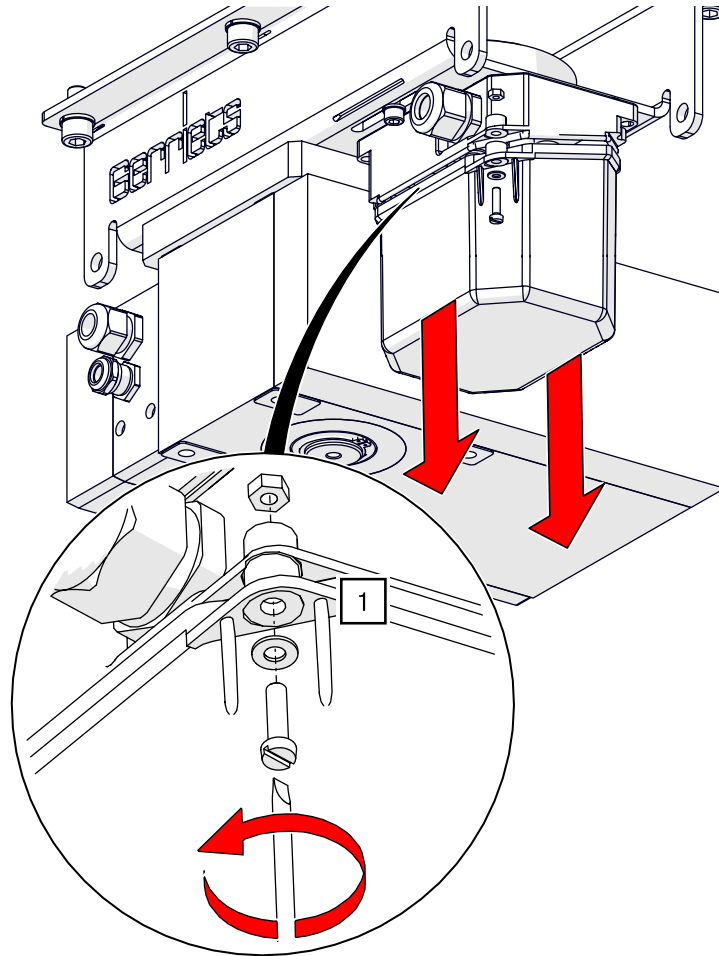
Setting emergency limit switches – Release adjustment wheels
